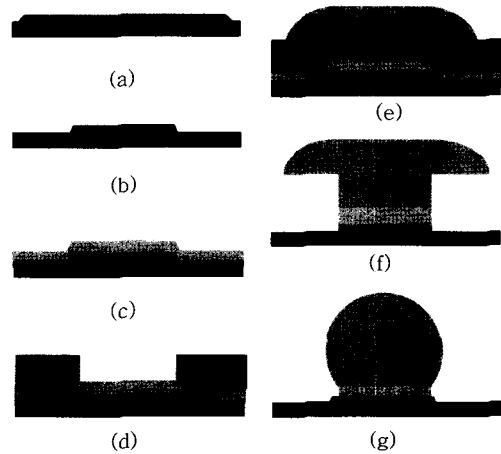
The experimental procedure of the flip chip solder bumping on electro-plating (a) Al sputter deposition (b) Al patterning (c) UBM deposition (d) Thick PR coating (e) solder electroplating (f) PR strip and UBM etching (g) solder reflow
